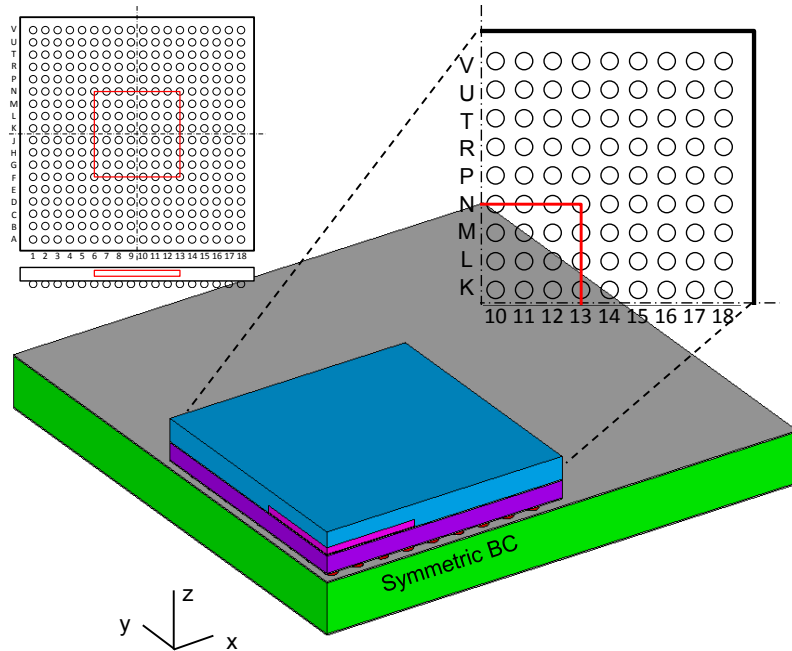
Quarter $15 \times 15 \text{ mm}^2$ PBGA Package Assembly
